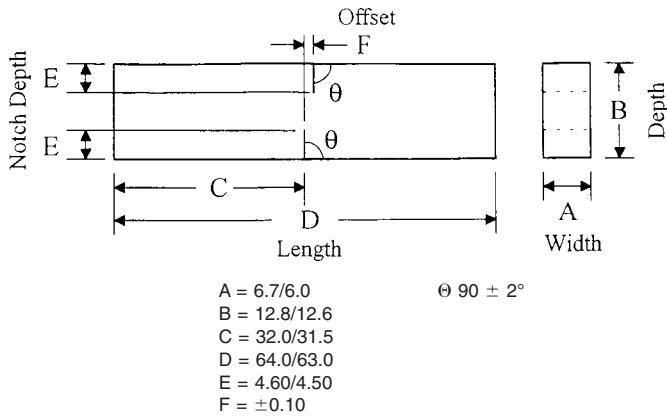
Dimensions of Double-Notched Izod Test Specimens
